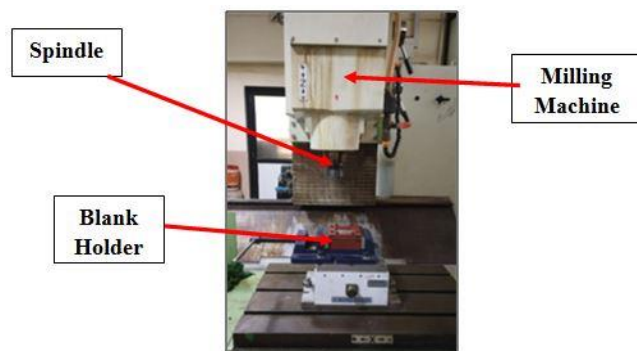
NC milling machine used as Single Point Incremental forming setup
